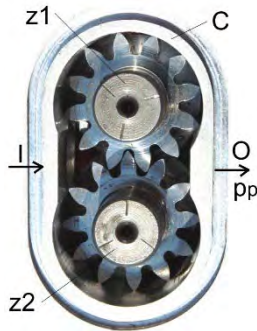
Pinion z_1 , gear z_2 and the two apertures I, O
